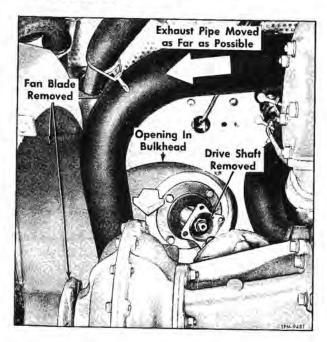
Access To Clutch Housing Through Engine Compartment (Typical)
